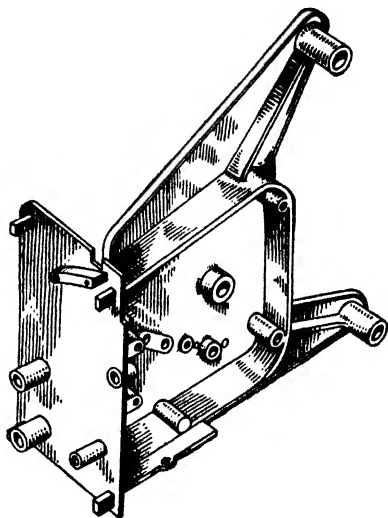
Sections are fairly uniform in this die-cast frame for a projection machine, partly because ribs are properly used, but there is some necessary thickening at bosses.
